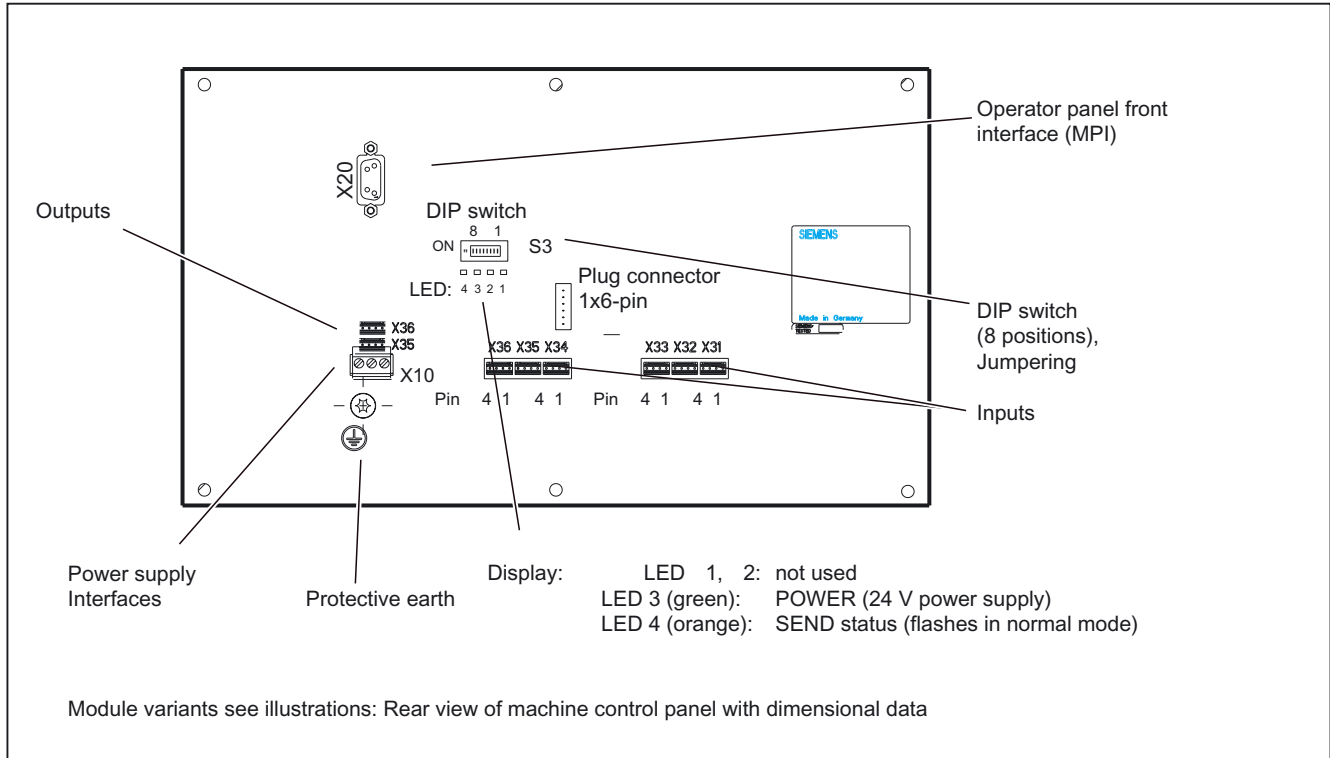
Rear view of the machine control panel with overview and location of interfaces
